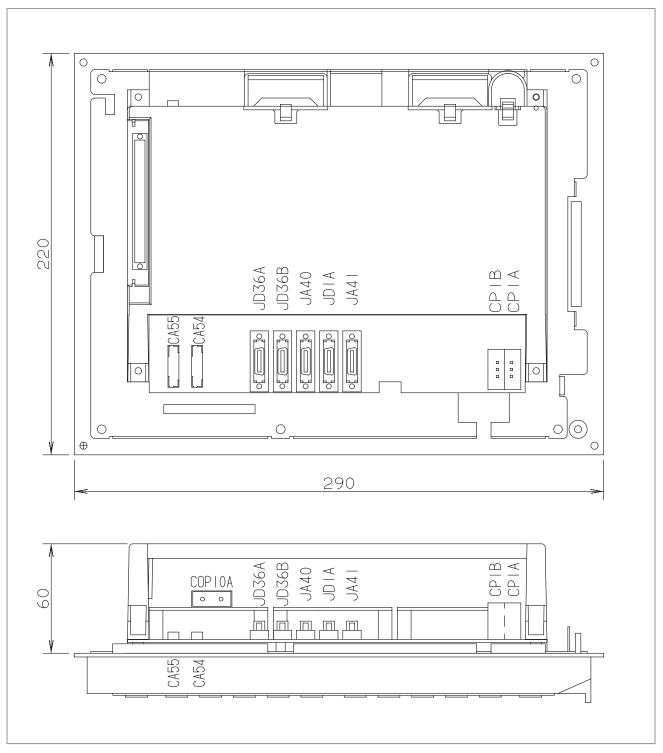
(c) Connector layout control unit with 9.5"/10.4" LCD
